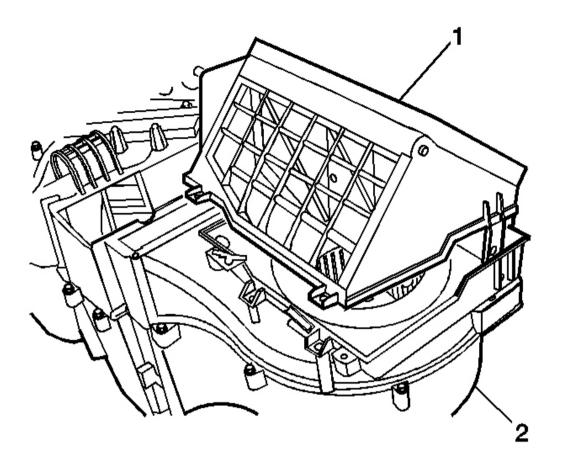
Air Distribution Housing And HVAC Module Courtesy of GENERAL MOTORS CORP.
